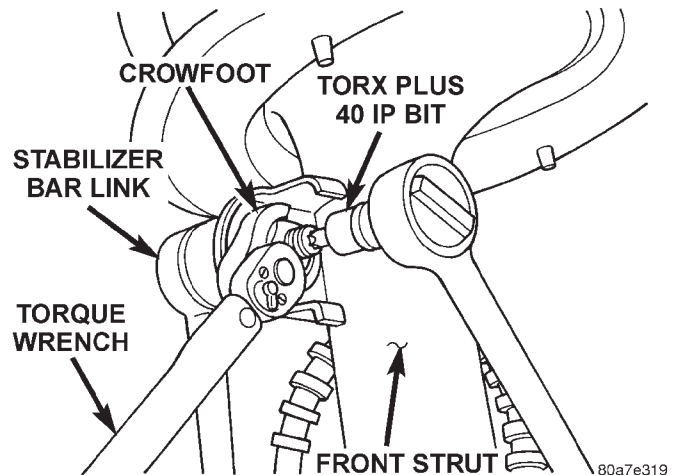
Torquing Stabilizer Bar Link To Strut Attaching Nut
